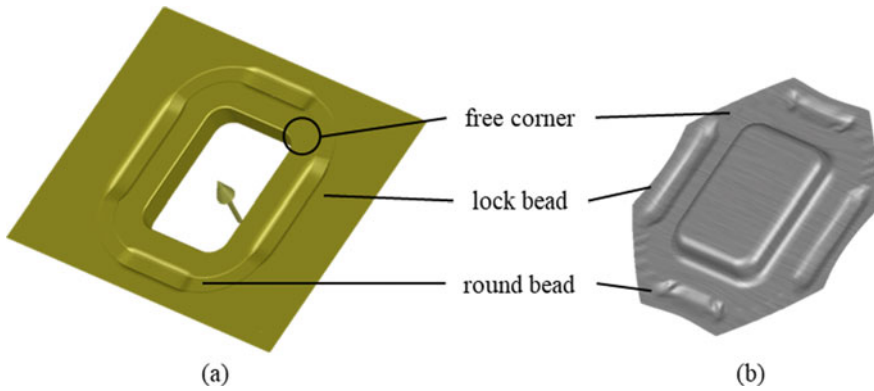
a Binder geometry with draw beads; b final rectangle cup
